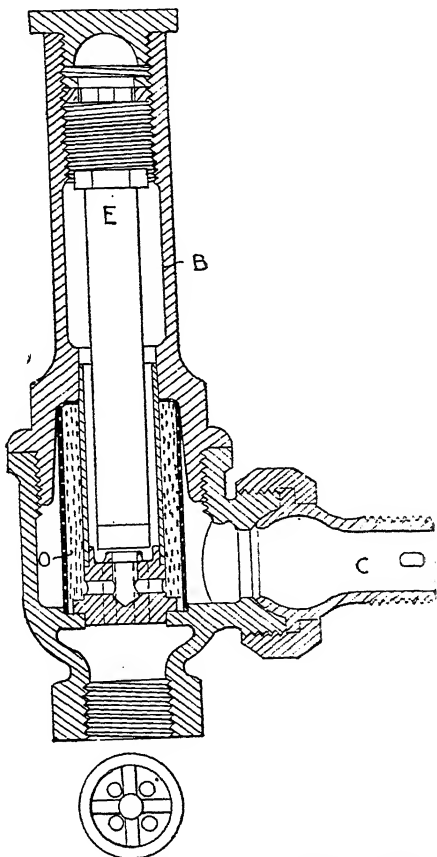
Thermostatic Relief Valve of the Atmospheric Steam Heating Co.
